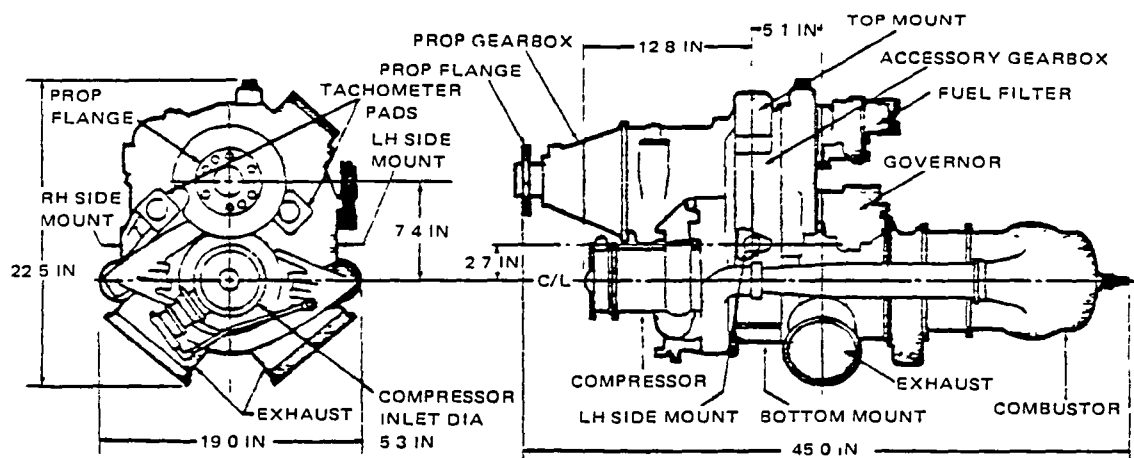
shows the two versions of the engine. The compressor, turbine, and combustor modules of a C20B version would be fitted to a B17 version accessory gearbox. A propeller gearbox would also be added. Discussions with Allison representatives suggest this modification would be less expensive than procuring a complete 250-B17 engine.
